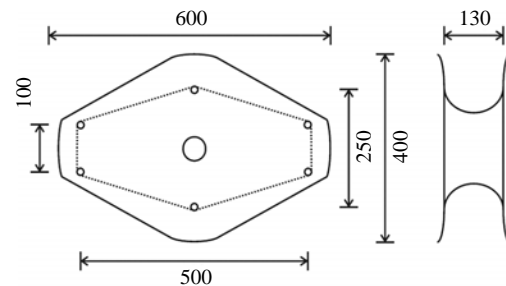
Rotary drum for continuous typed largehead hairtail hand line(unit : mm).
